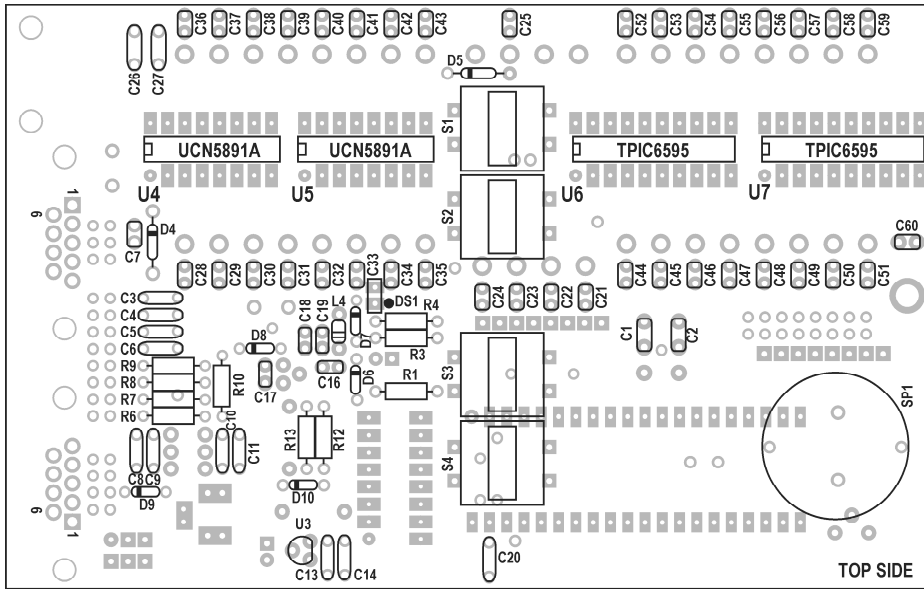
KRC2 PCB corrected top view / silk screen parts placement
